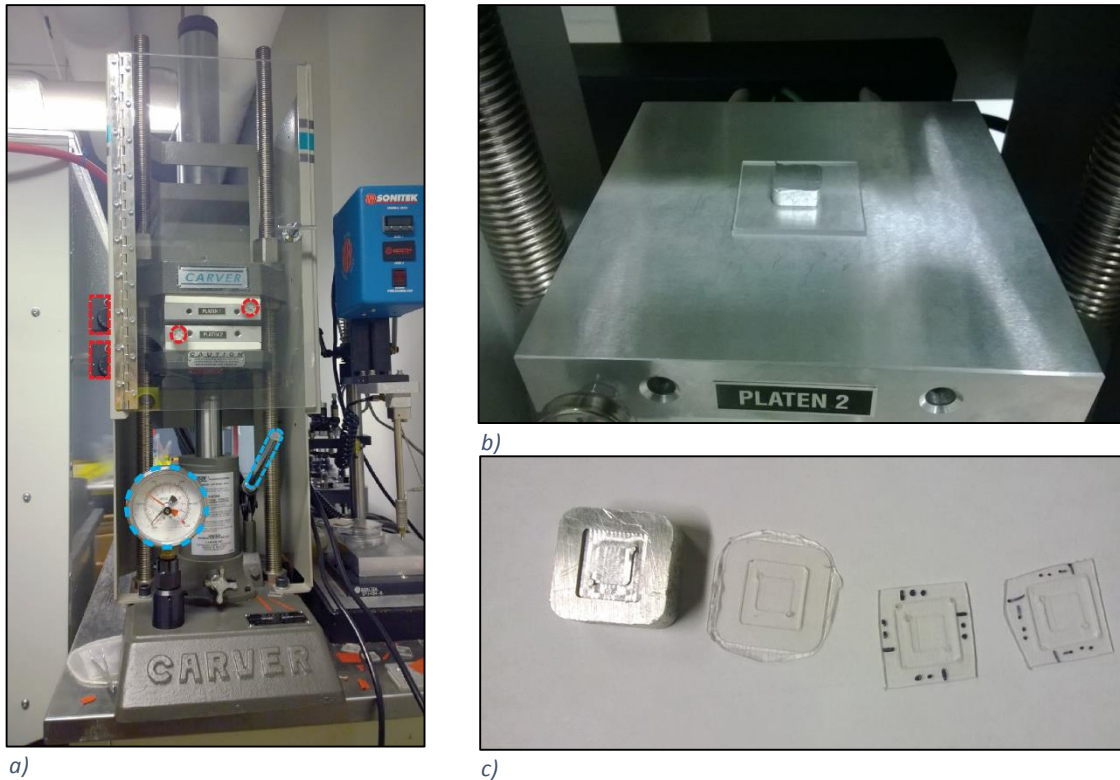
Hot Embossing Equipment: a) Hot press with temperature (red) and pressure (cyan) controls; b) Aluminum mold on the PC substrate before embossing; c) Aluminum mold with embossed pieces.
